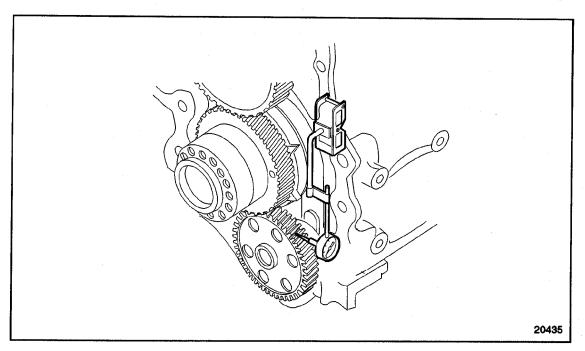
Crankshaft Timing Gear-to-Oil Pump Idler Gear Lash Measurement
